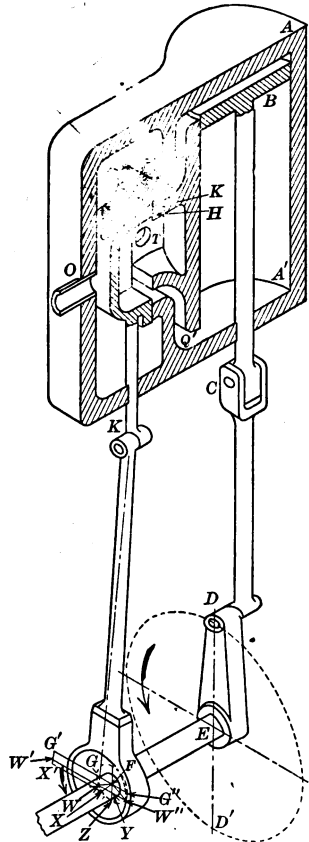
SHOWING VALVE WITH STEAM LAP
